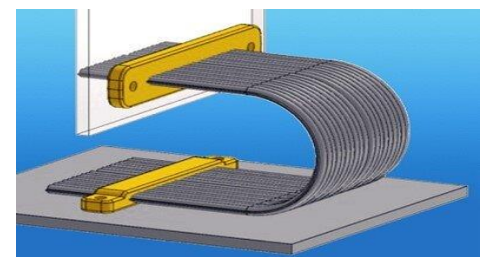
Overmold on an HPF cable parallelly installed to a mounting surface
